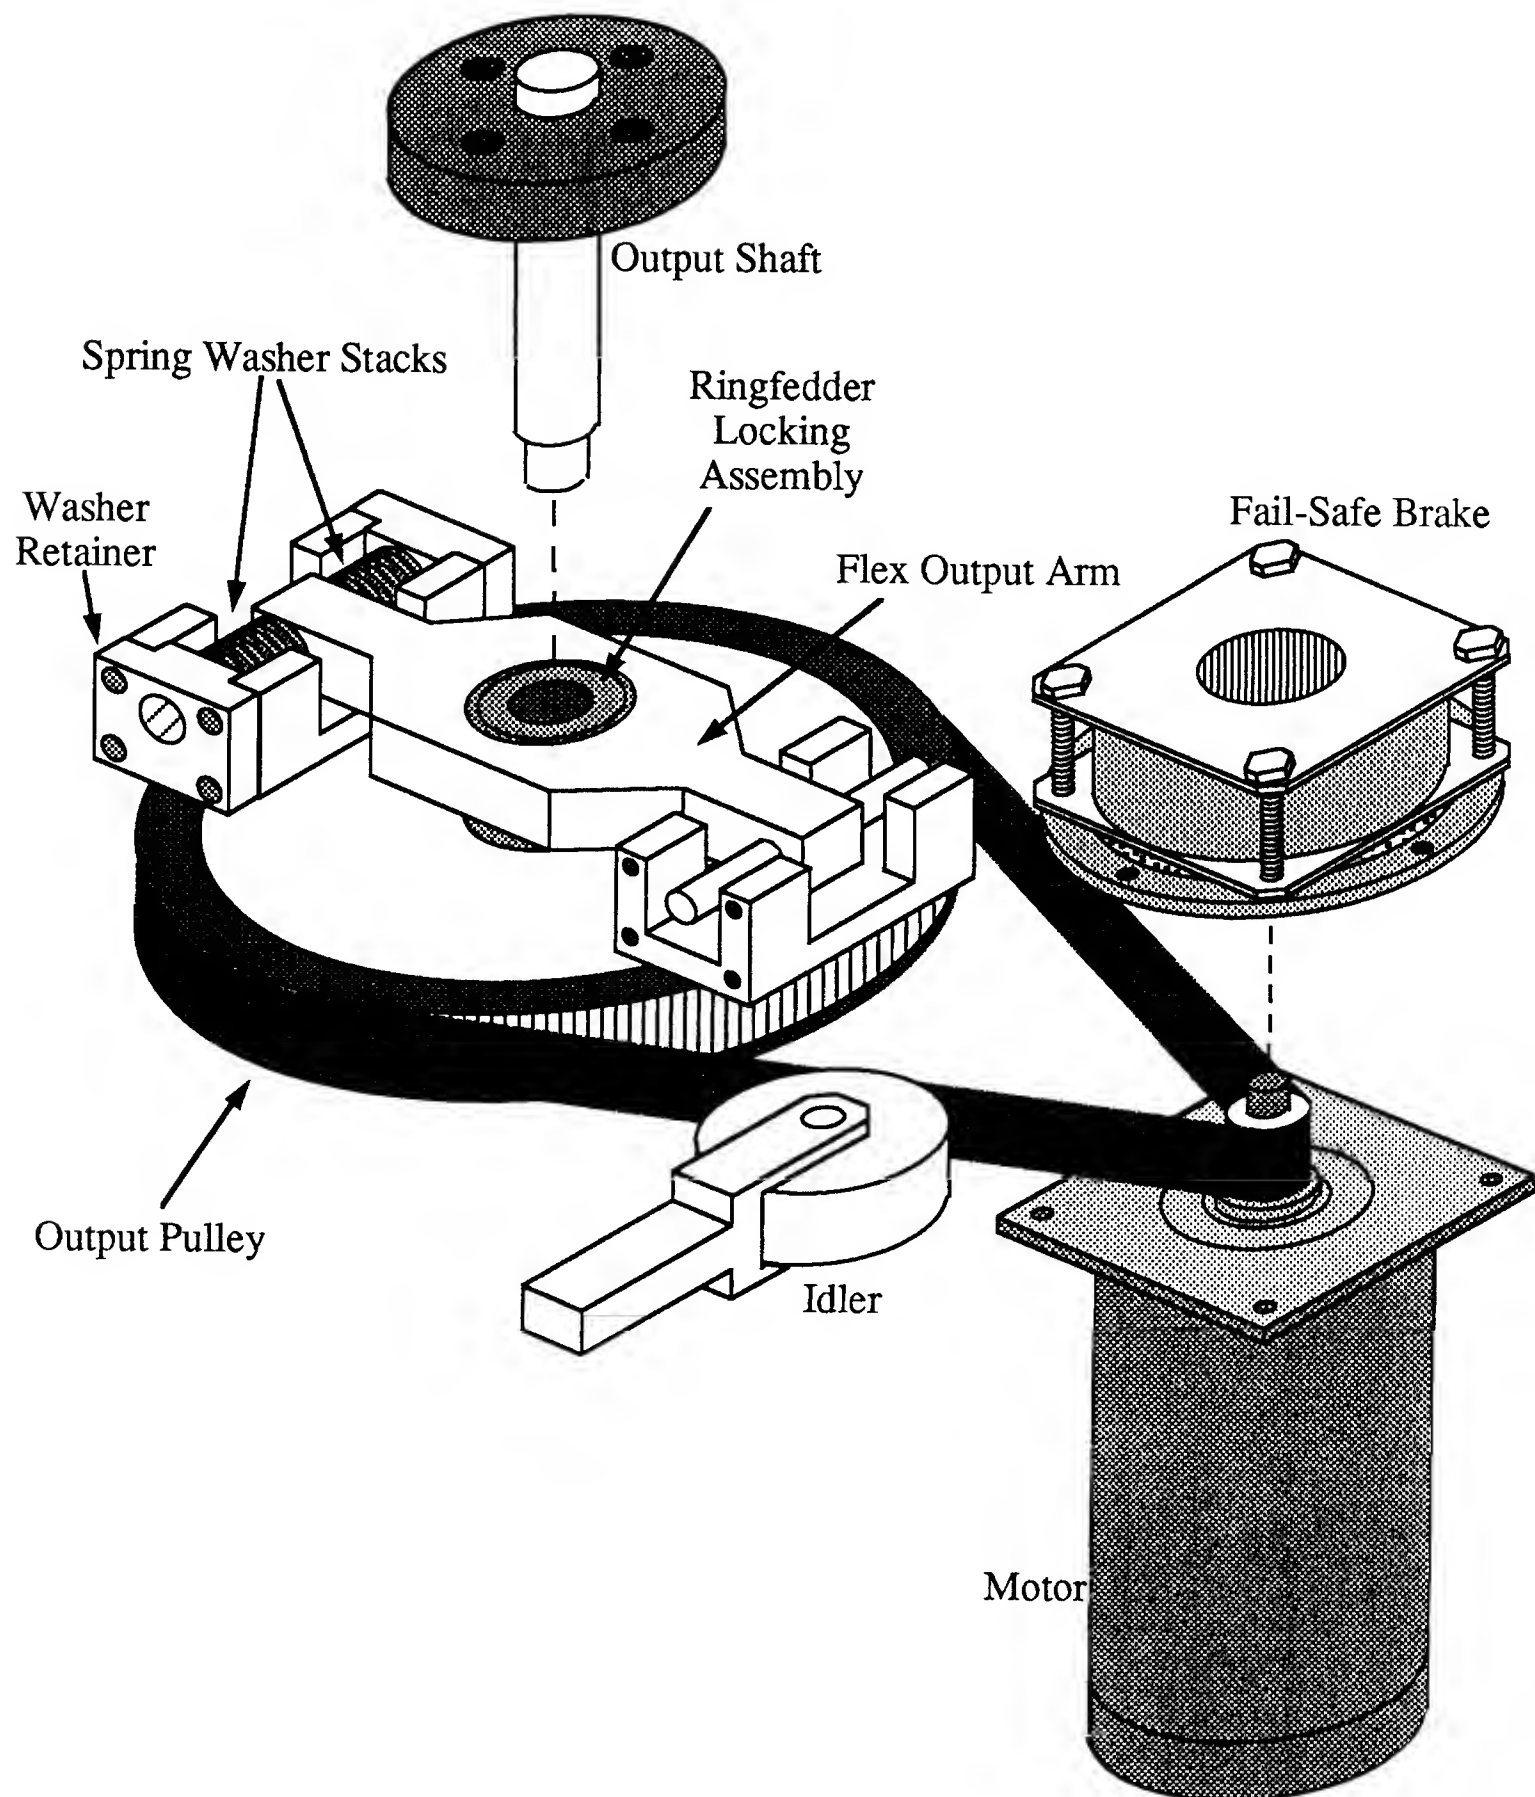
Isometric of the base joint drive train. Not shown is the motor and idler mounting hardware.
